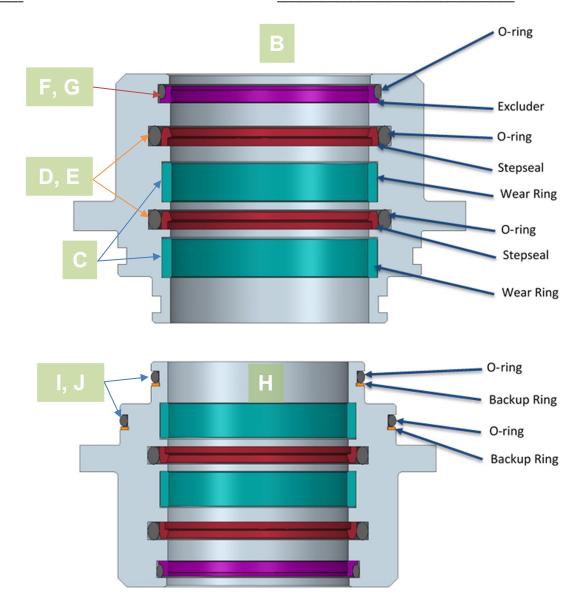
Install Rings and Seals into and onto Rod Bushing
